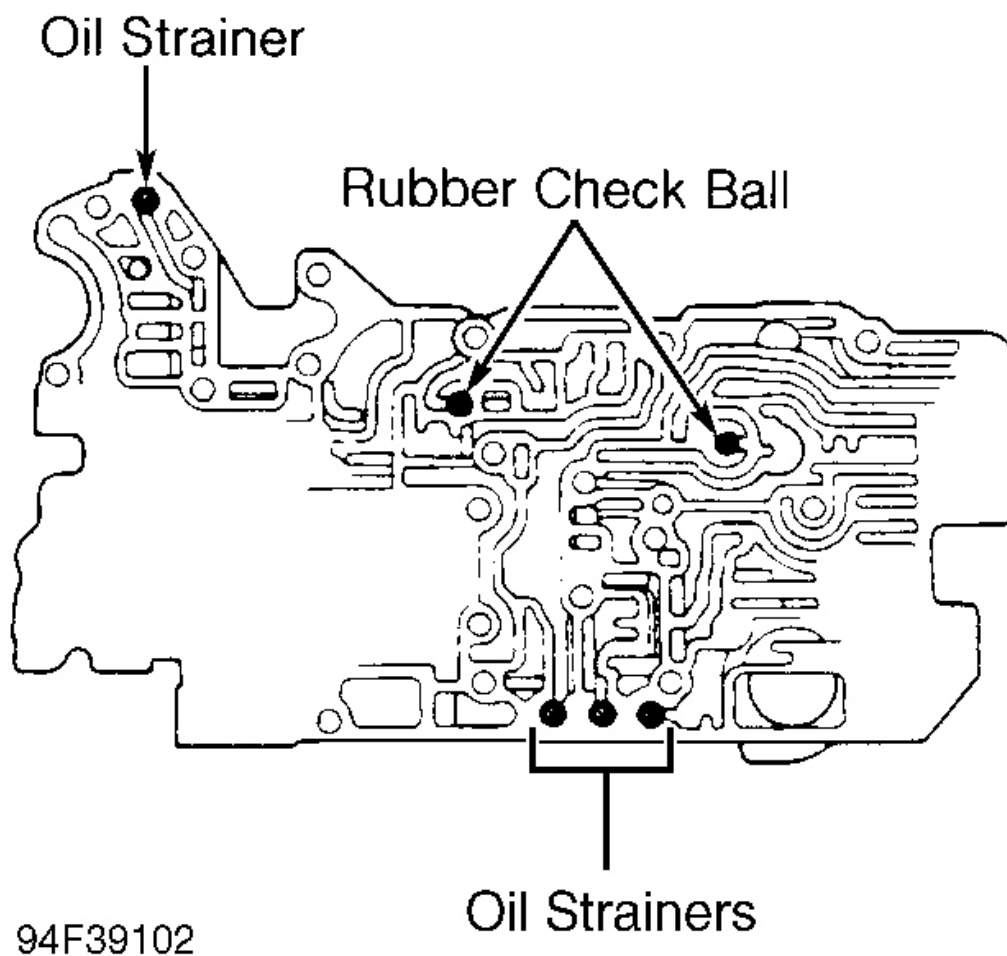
Locating Valve Body Check Balls & Oil Strainers - Premain Valve Body (Underside)
